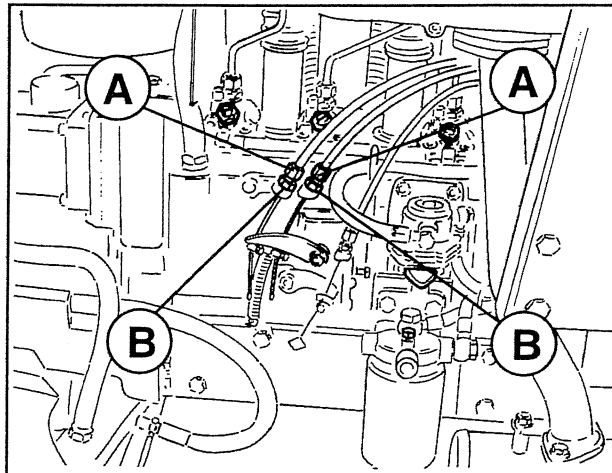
Adjusting the stroke of the accelerator pedal and hand throttle (model 4040).
